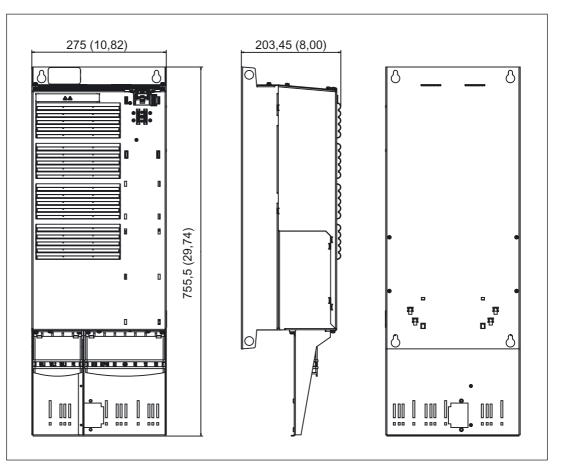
Dimension drawing: PM340 Power Module with Screening Kit, frame size FSE, all dimensions in mm and (inches)
